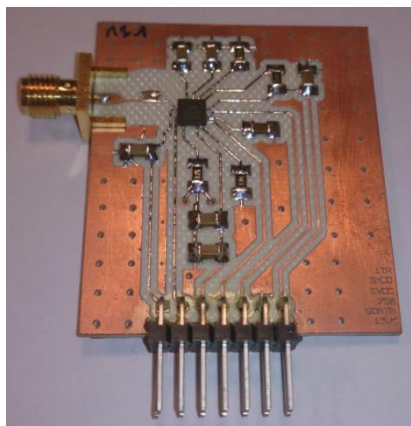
Picture of the DSRC transponder chip RF prototype board.
